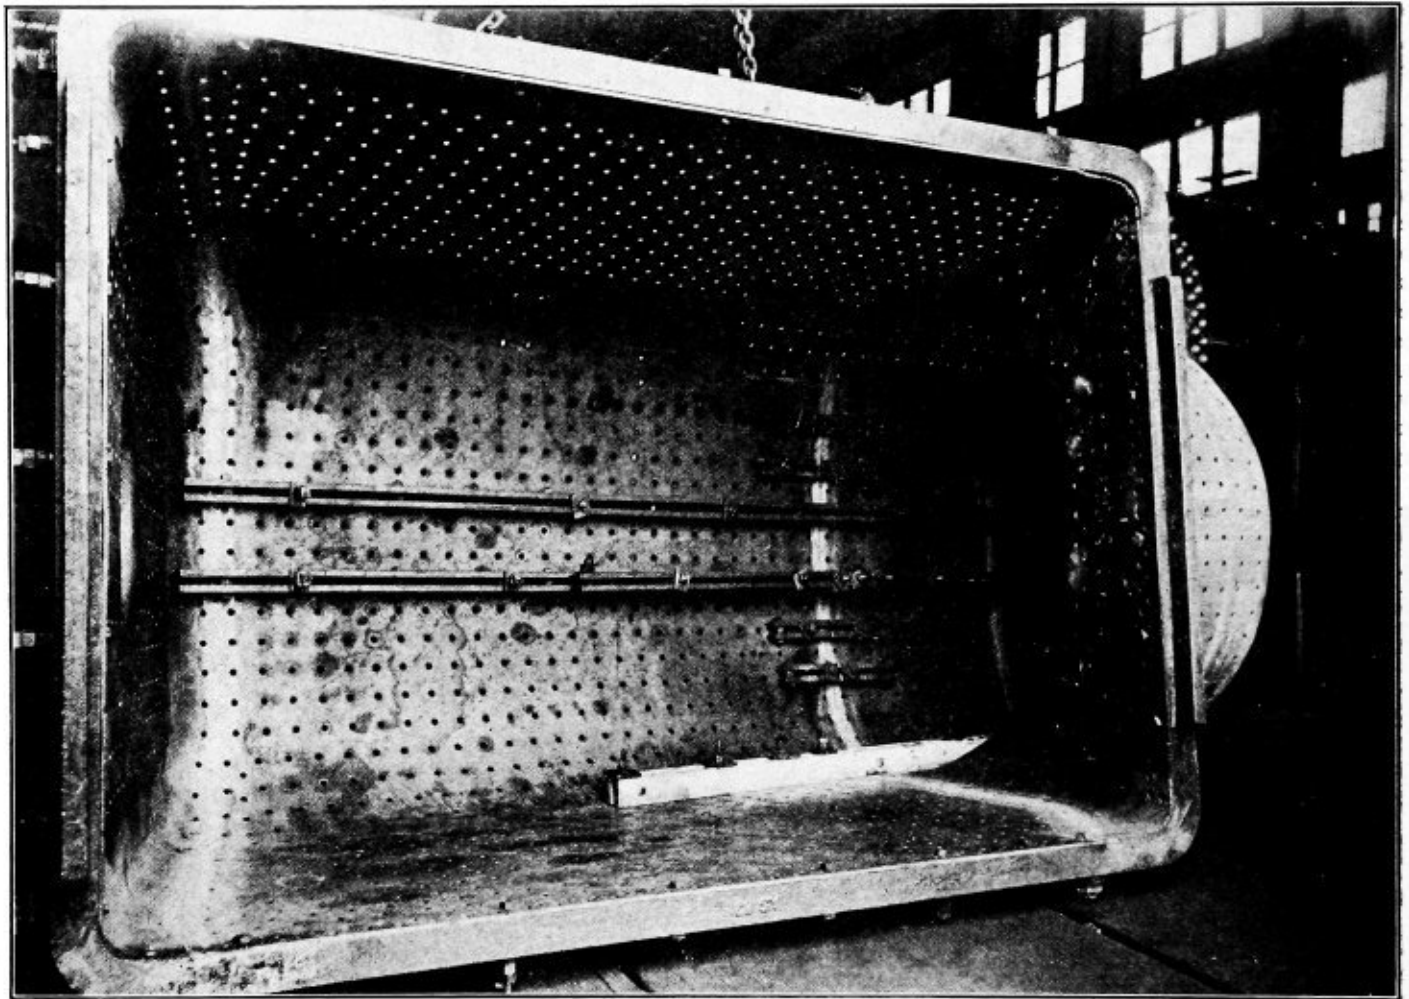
Interior of Firebox After Welds Are Finished, Showing "Strong Backs" in Place
